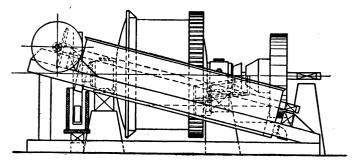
Akins classifier in closed circuit with ball mill, 31
